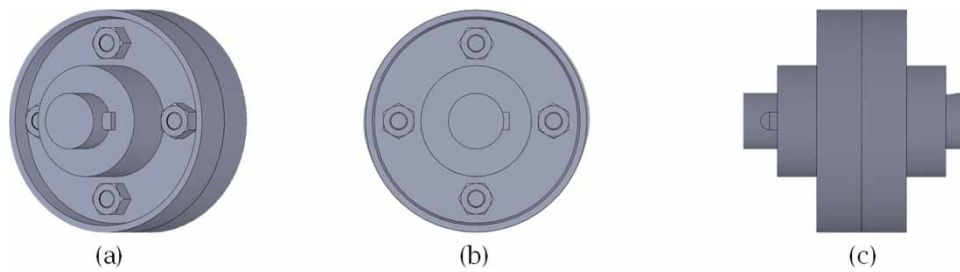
Assembly of two main parts with circular patterns of screws and bolts: (a) 3D view, (b) Front view, (c) Right view.
